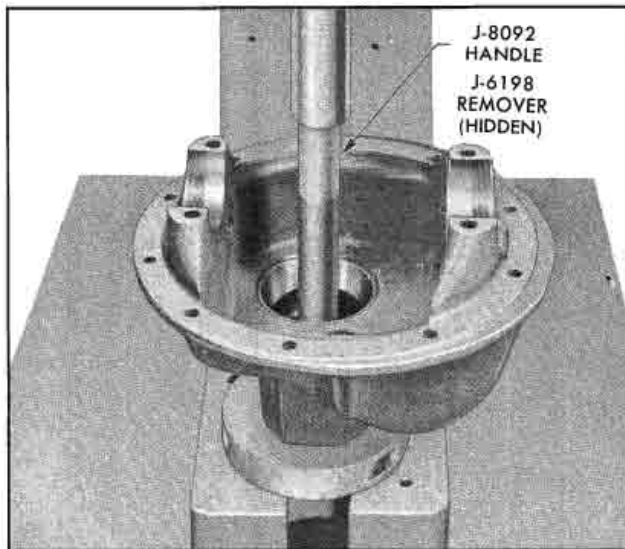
Removing Front Pinion Bearing Outer Race with J-6198 and Drive Handle J-8092
